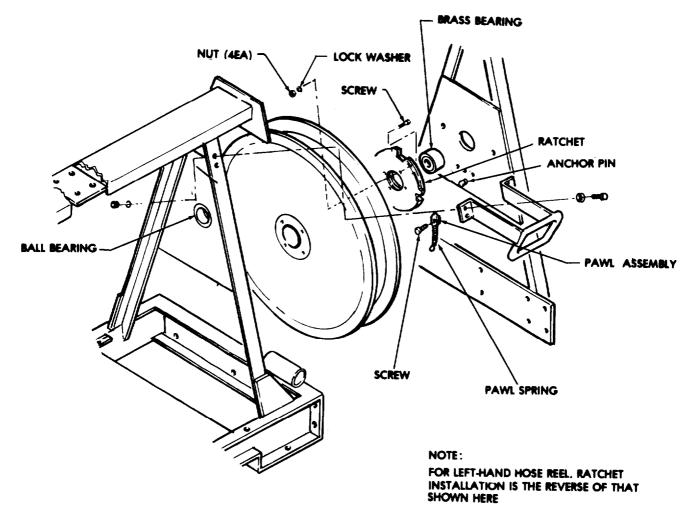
Hose Reel Ratchet and Pawl Assemblies.
